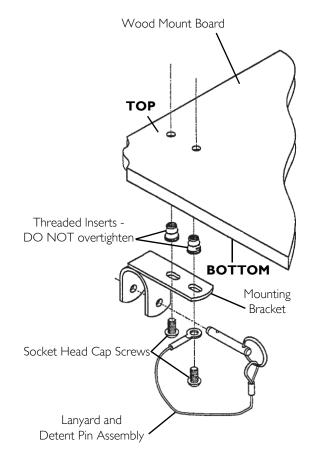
Attaching a Wood Mount Board to the Wheelchair Seat Rails
